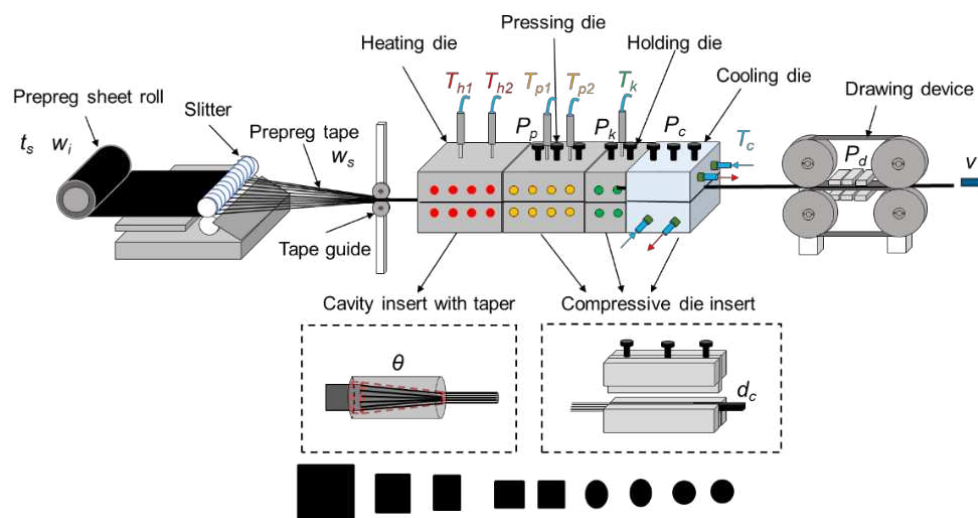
Manufacturing of round rod by laboratory-scale prepreg tape pultrusion machine
